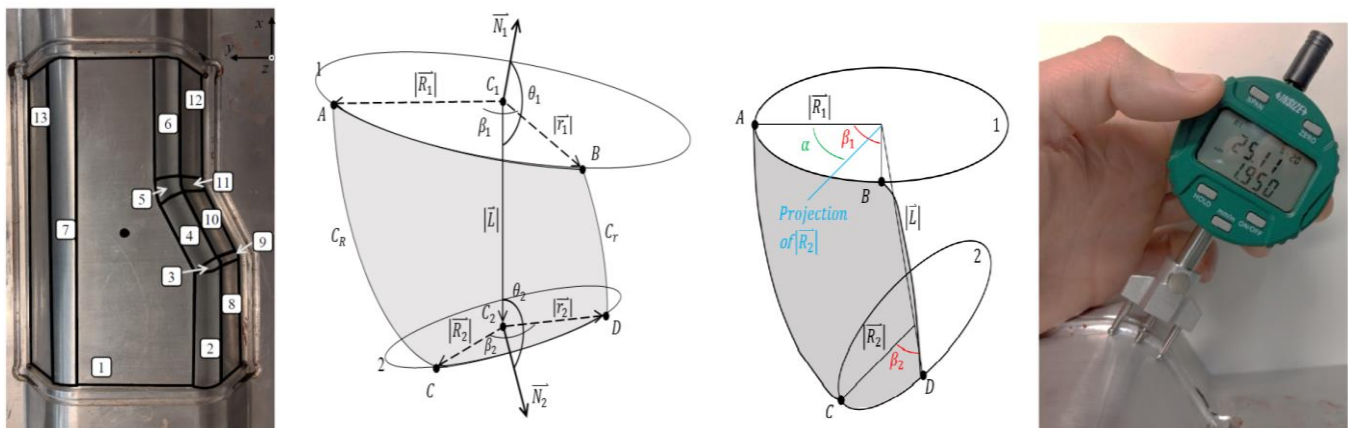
Base surfaces, conical frustum and its geometric parameters, along with measurements on mould [A]
